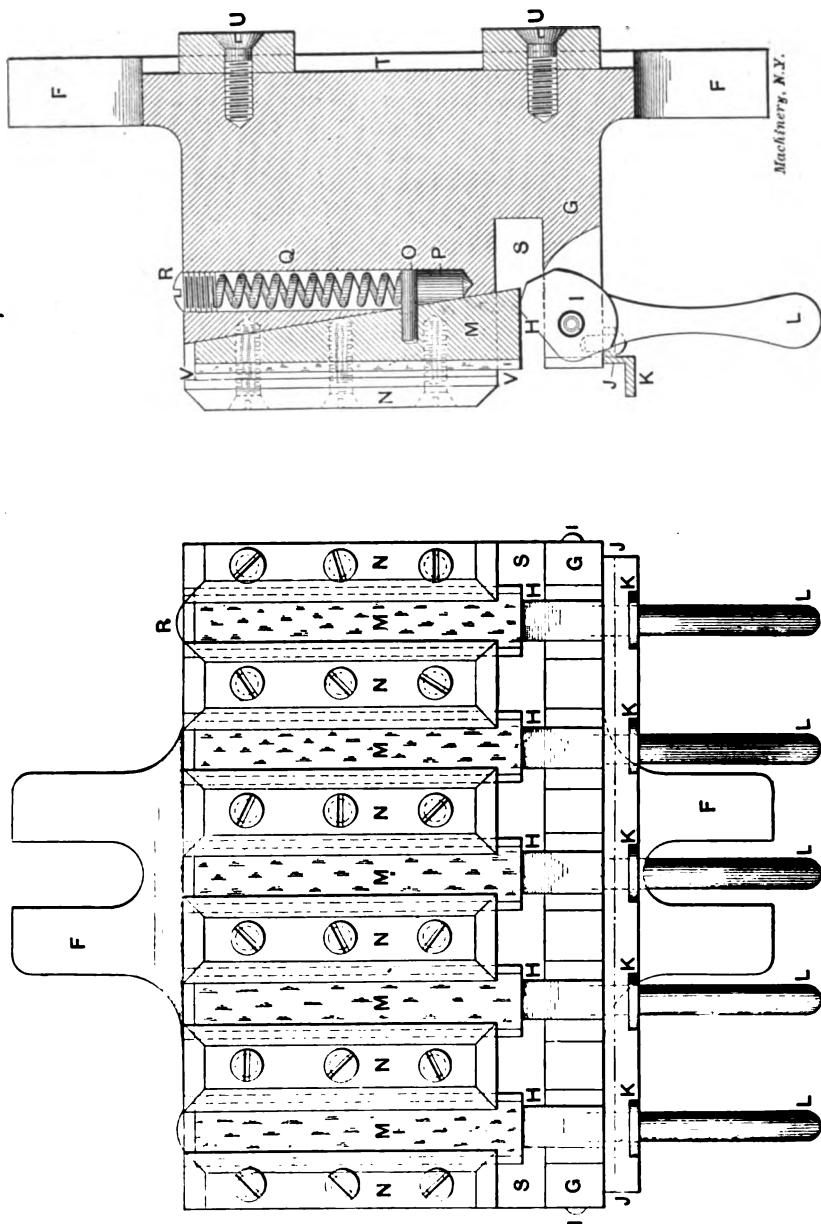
Plan of Fixture for Milling Work shown in Fig. 62.
